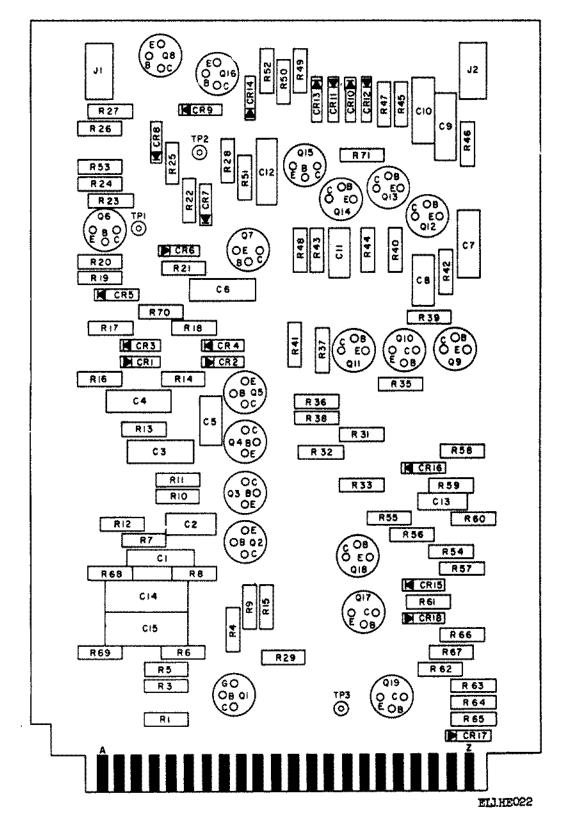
Printed-circuit card assembly A8 (PC 80034020), component location diagram.
